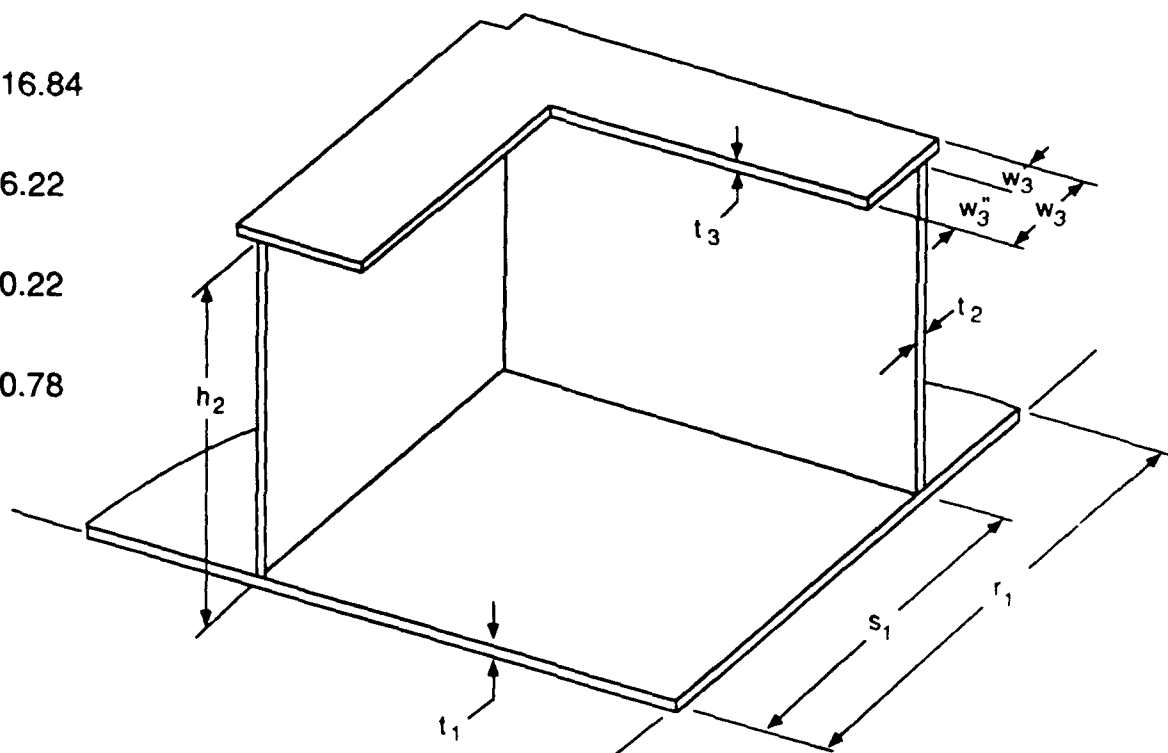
Bulkhead test panel geometry showing circular plate and square T-frame stiffener. The entire assembly was welded into a circular fixture. Hydrostatic pressure was applied from the stiffened side.
